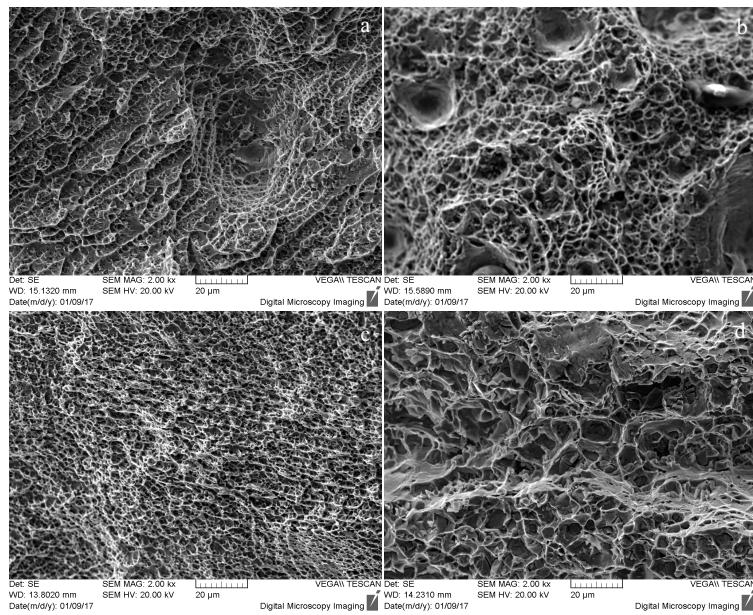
Fracture surfaces of laser repaired Inconel718 superalloy samples deposited with different magnetic field currents: (a) 0 A, (b) 20 A, (c) 40 A, and (d) 60 A
